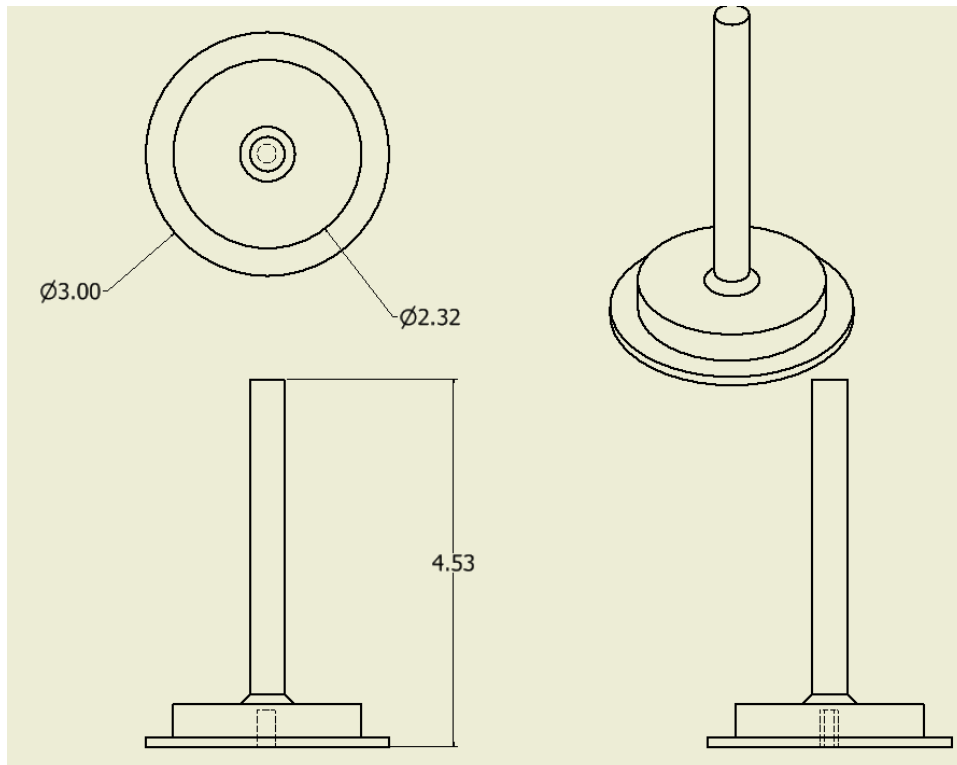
Mechanical Sketch – Spooler Connecting Rod
